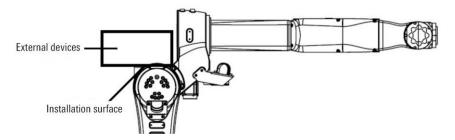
Diagram of installation dimensions for elbow load of AIR10-1700A-HW manipulator
